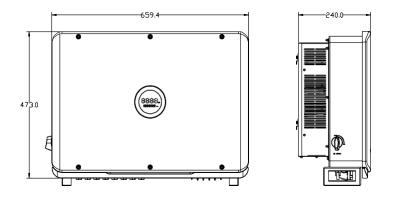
Dimensions of R6-36K/40K/50K-T4-32; R6-25K/30K-T4-32-LV
